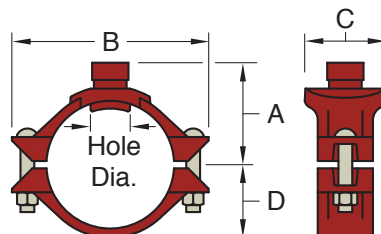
Branch Outlet with Grooved Branch (Tee Configuration)
